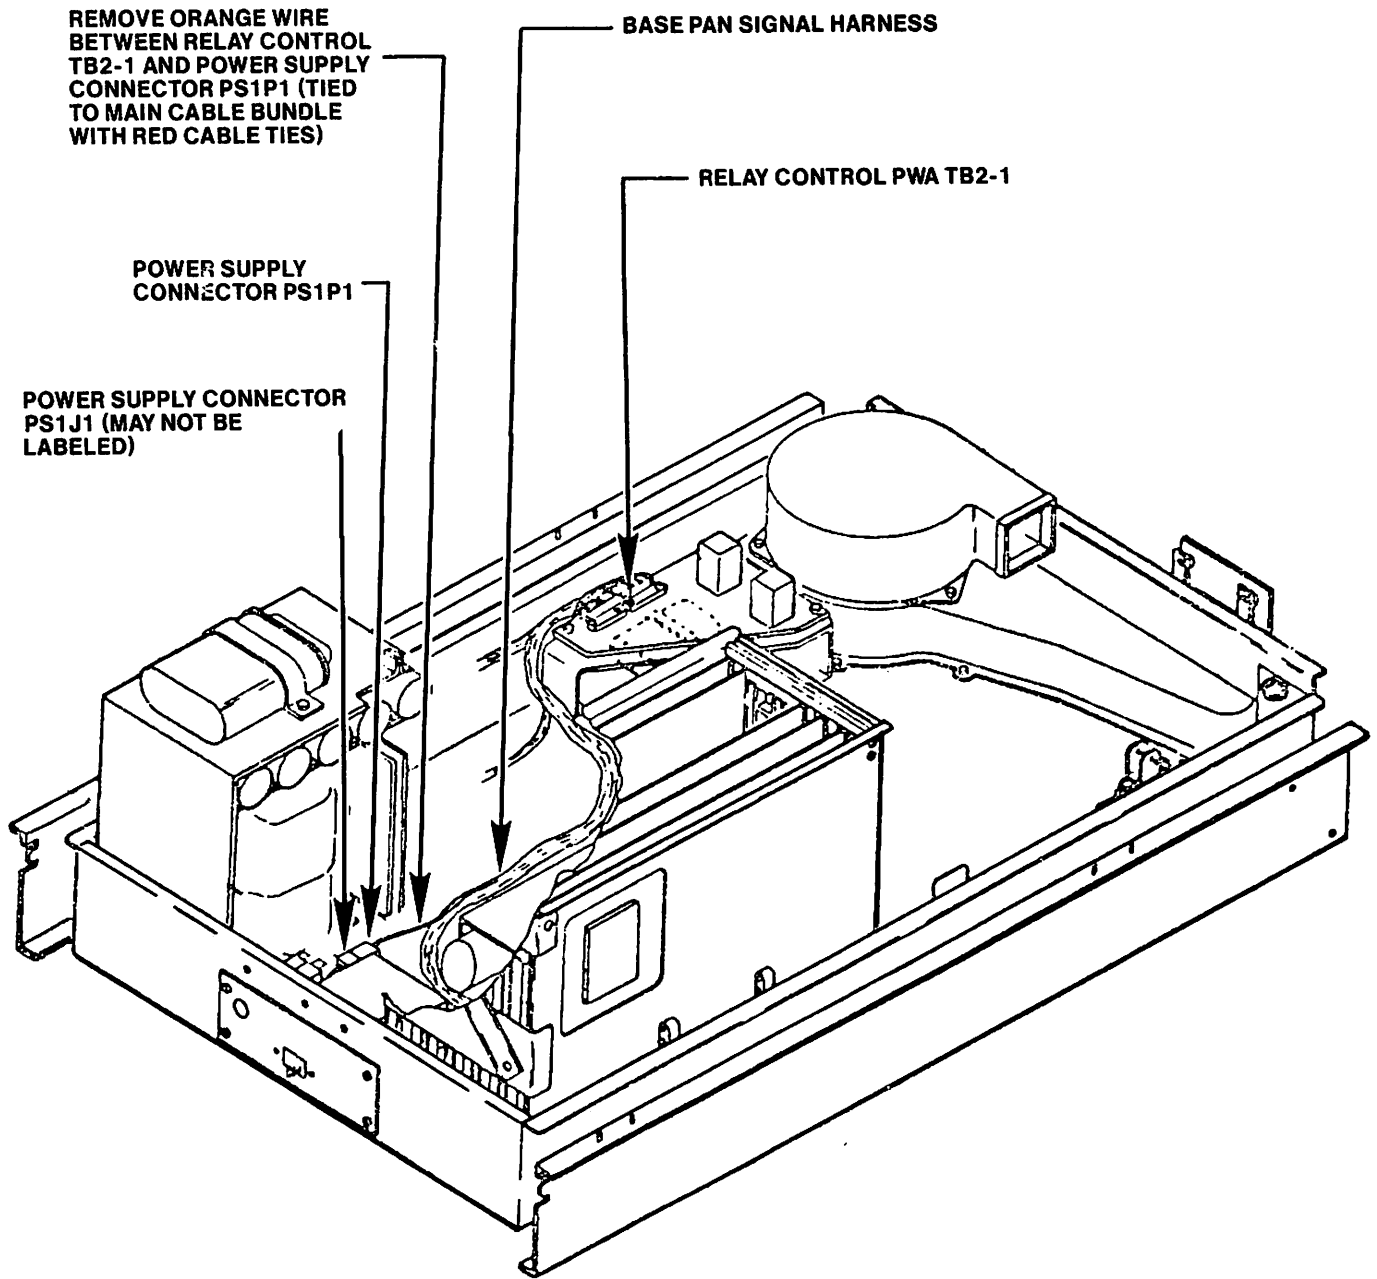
Base Pan Cutaway Showing Base Pan Signal Harness and Power Supply Connector PS1P1
